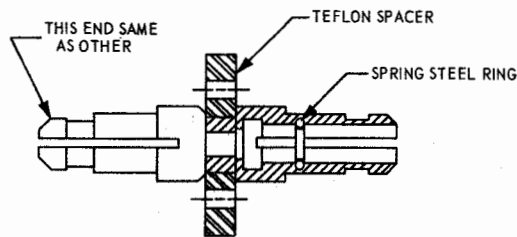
Cut-Away View of Inner Coupling (Bullet)
